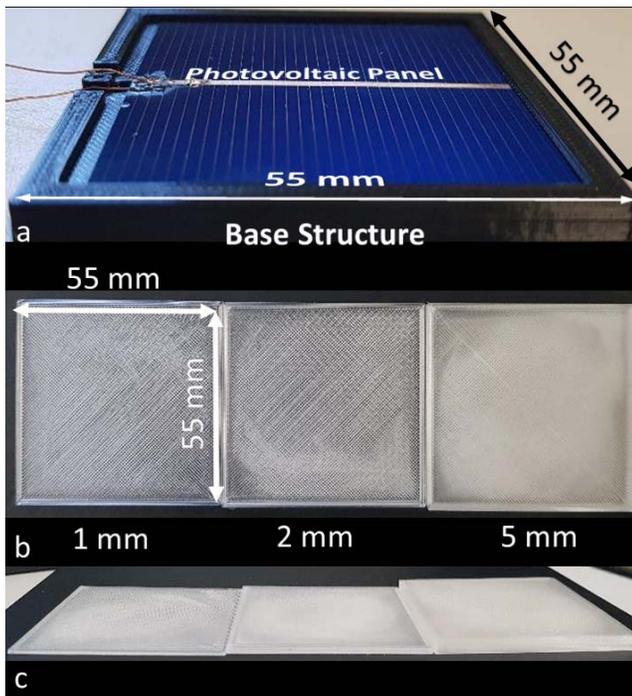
a) Photovoltaic panel placed on top of the base 3D printed structure. b) Top view of the 1mm, 2mm and 5mm 3D printed transparent covers. c) side view of the 3D printed covers
